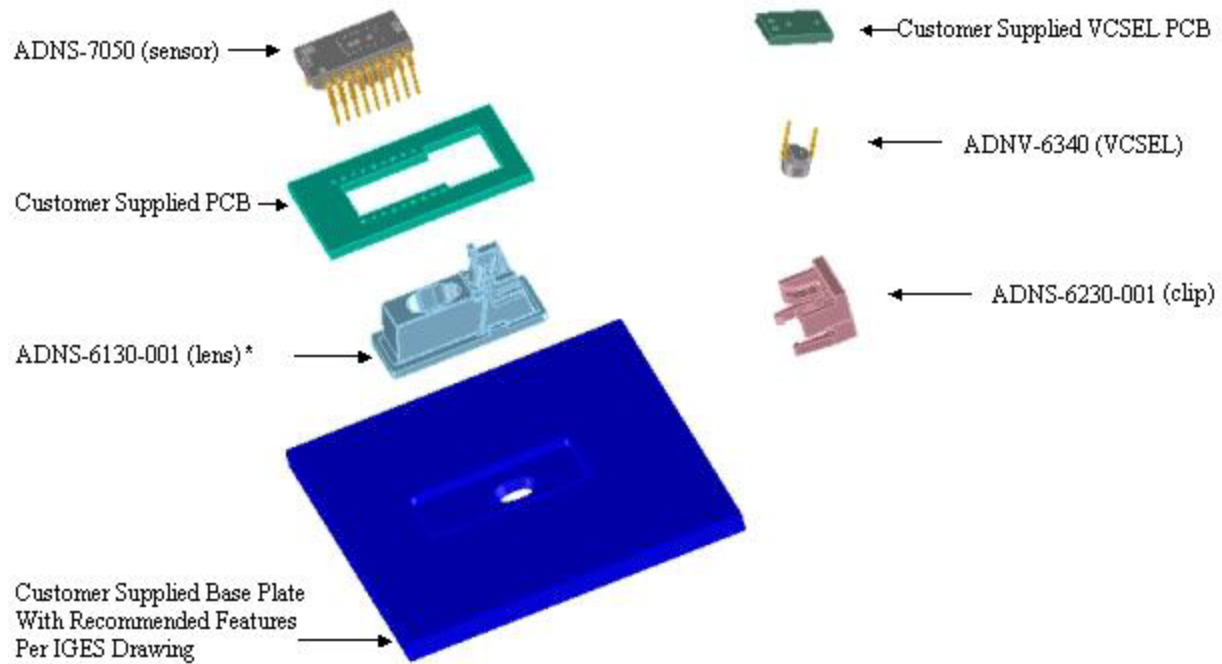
Exploded view drawing of optical tracking engine with ADNS-7050 laser mouse sensor
